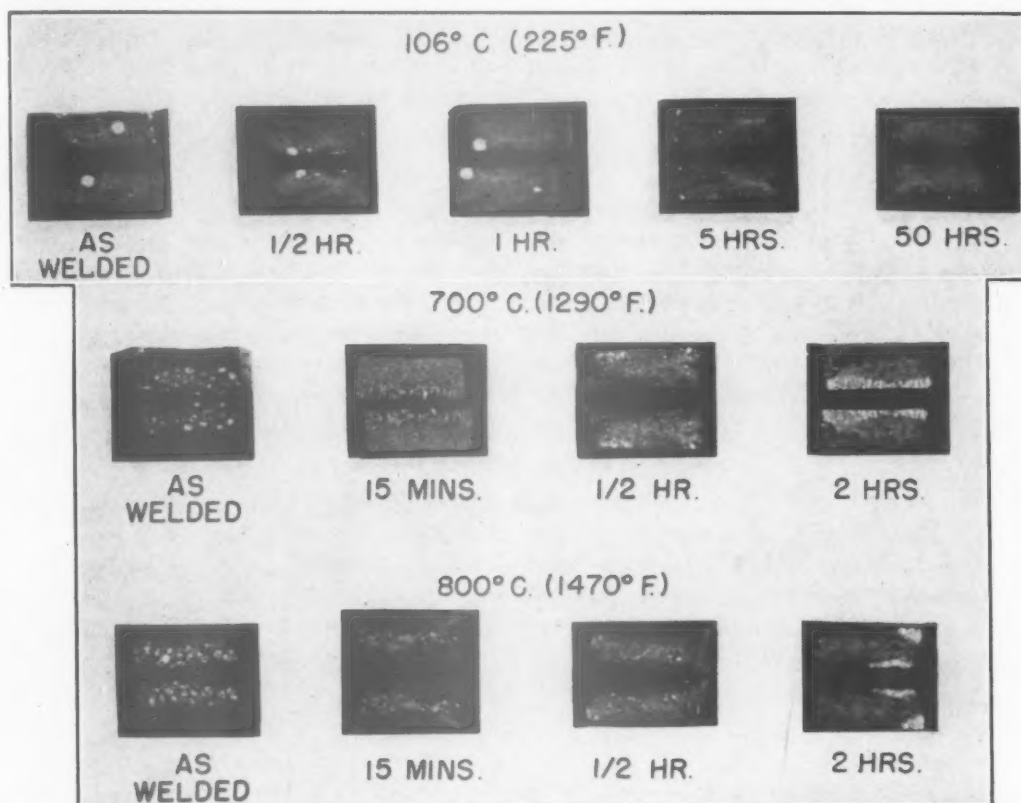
TENSILE FRACTURES OF WELD SPECIMENS SHOWING EFFECT OF ANNEALING ON DEFECTS CAUSED BY HYDROGEN.
